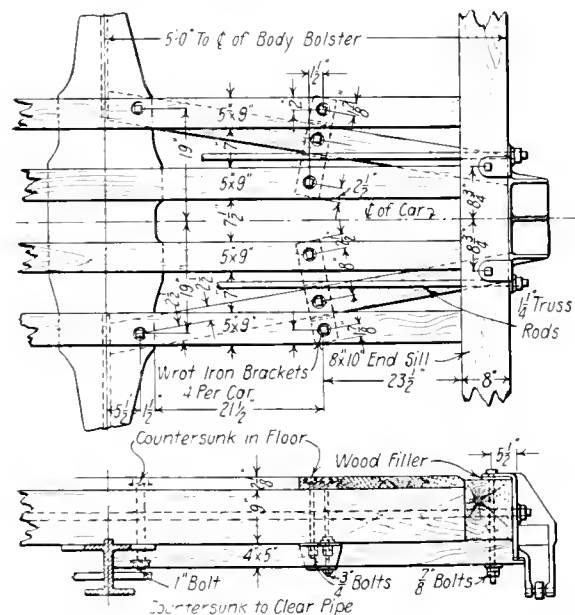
Method of Bracing Between Striking Plate and Body Bolster
